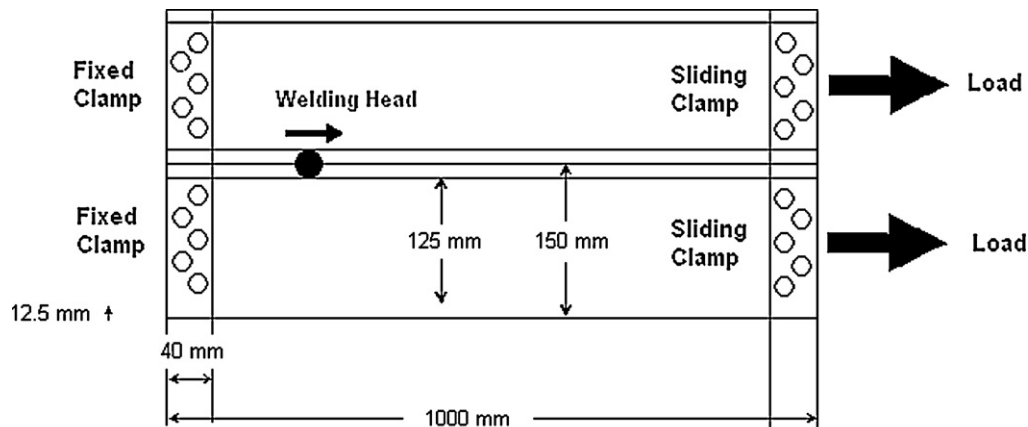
Mechanical tensioning method and equipment used to generate the sample welds.
